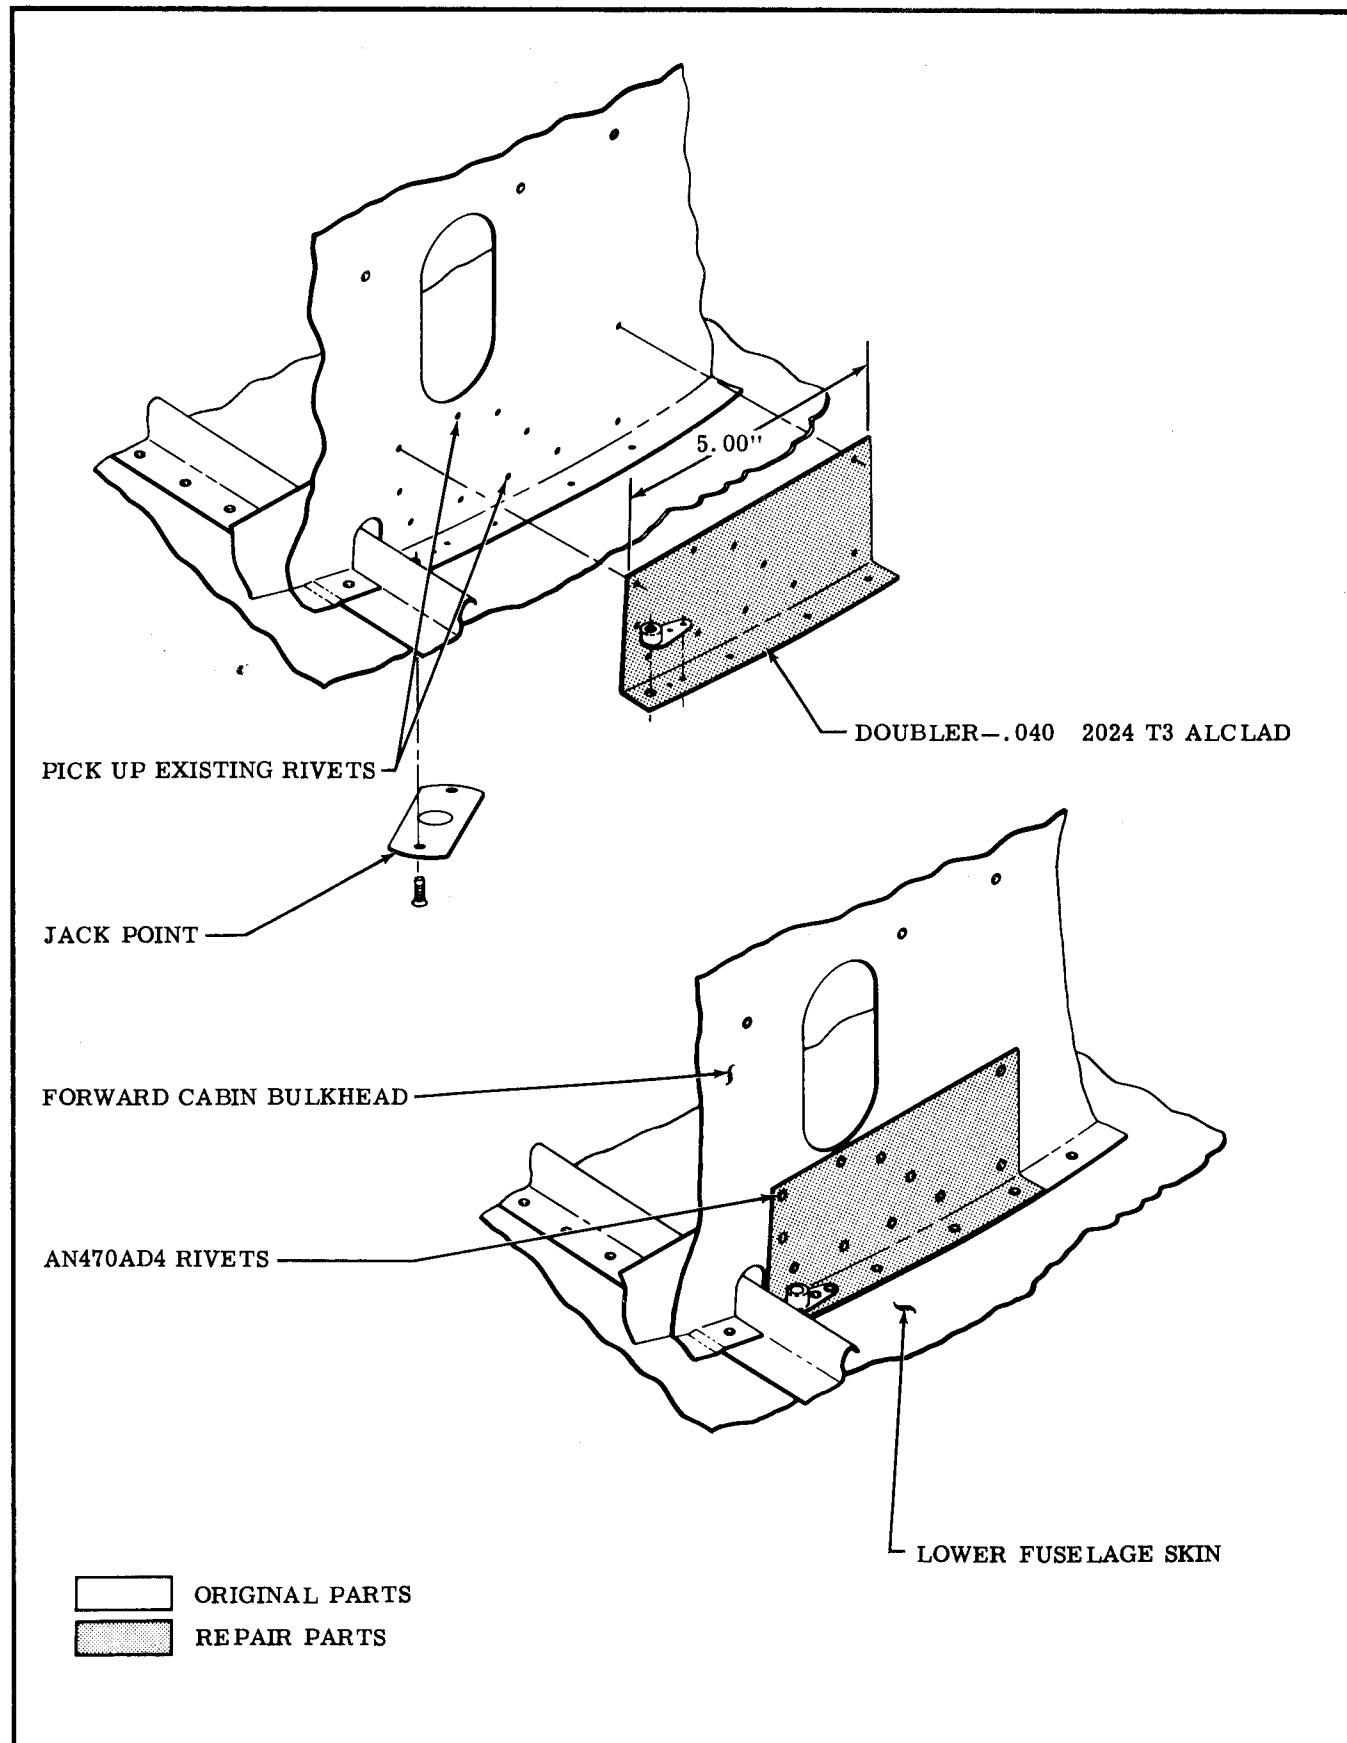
Jacking Point Reinforcement (Sheet 2 of 2)
